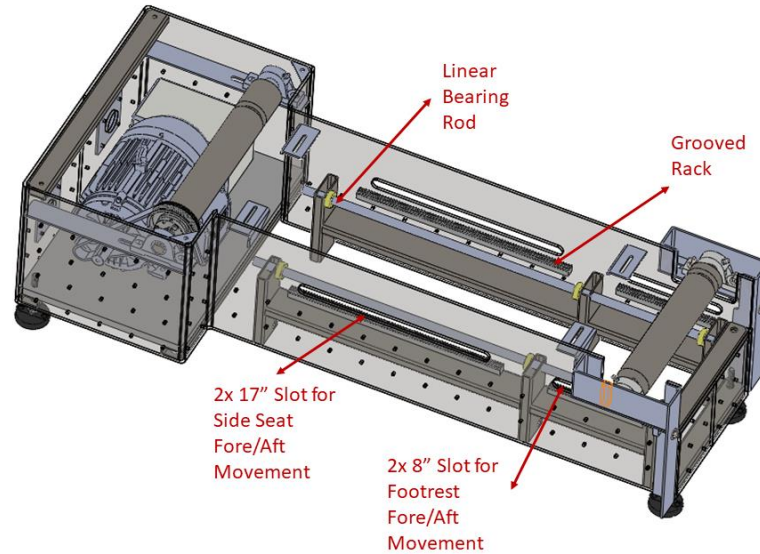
Isometric Treadmill View with Exposed Internal Seating Adjustment Components
